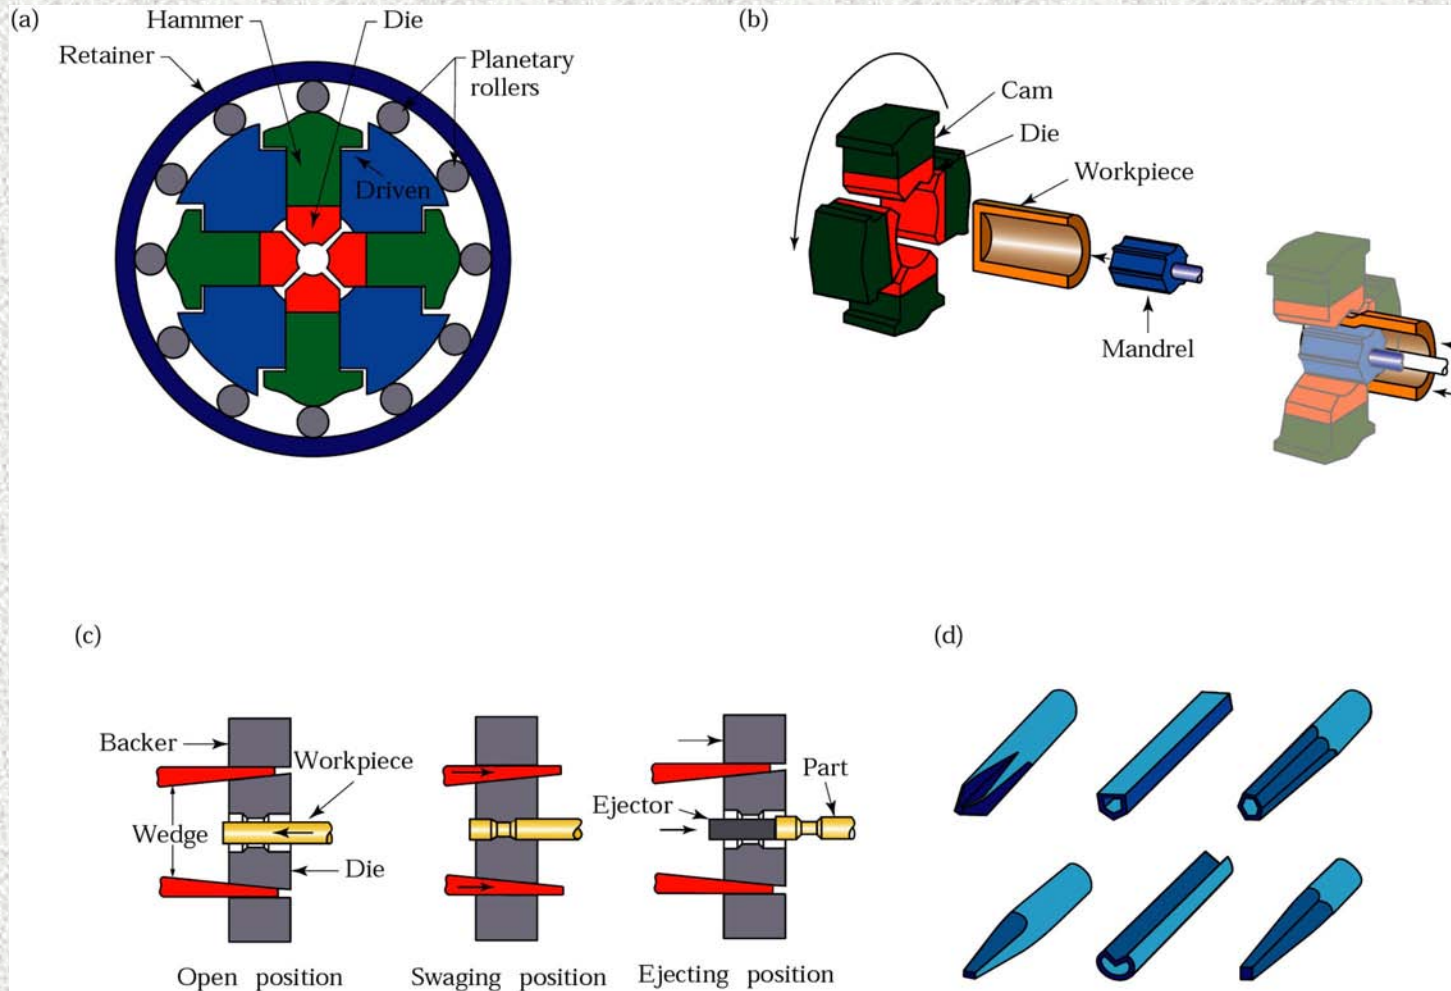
(a) Schematic illustration of the rotary-swaging process. (b) Forming internal profiles on a tubular workpiece by swaging. (c) A die-closing type swaging machine, showing forming of a stepped shaft. (d) Typical parts made by swaging.
